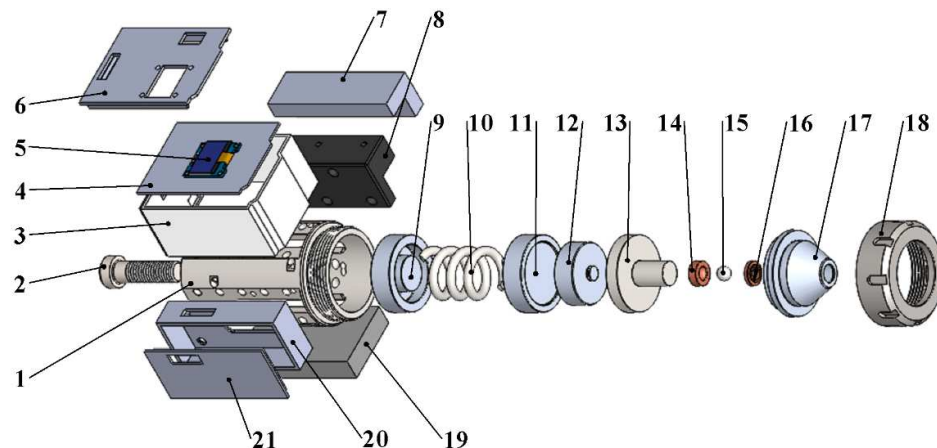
Exploded view of the ball-burnishing tool assembly and its components.
